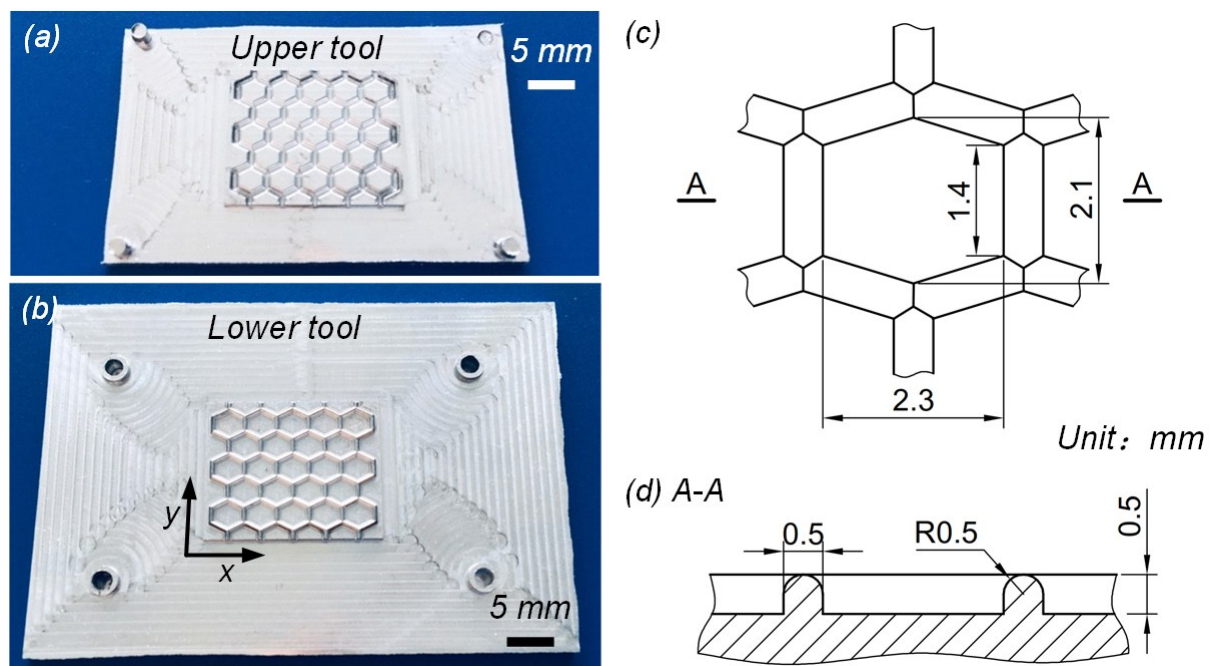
Upper tool (a) and lower tool (b) with hexagonal micro structures. The top view (c) and cross-sectional view (d) of hexagonal micro structures on the lower tool.
